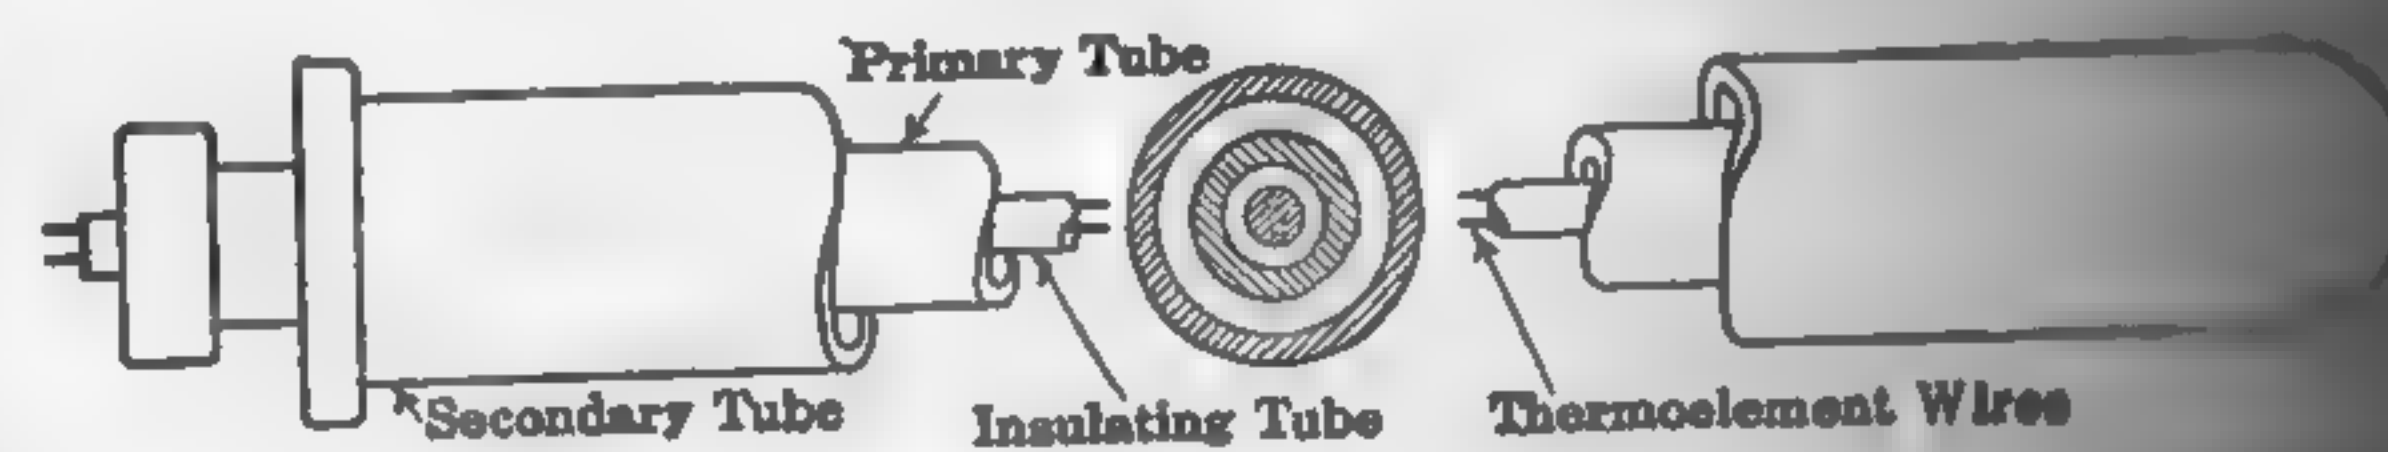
Engelhard Rare-metal Thermocouple with Protecting Tubes.
